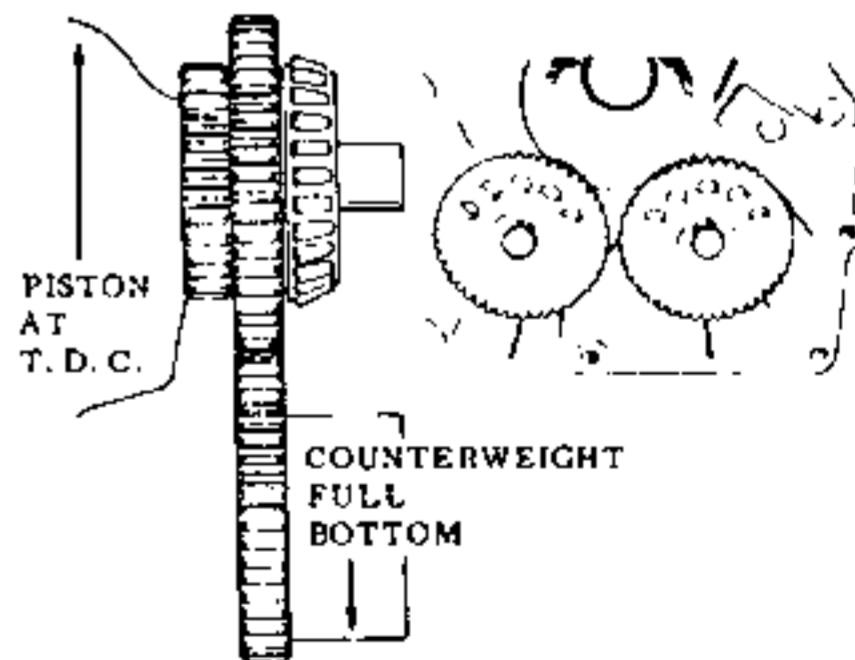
On Models HH80, HH100 and HH120, balancer gears are correctly timed to crankshaft when piston is at TDC and weights are at full bottom position.
